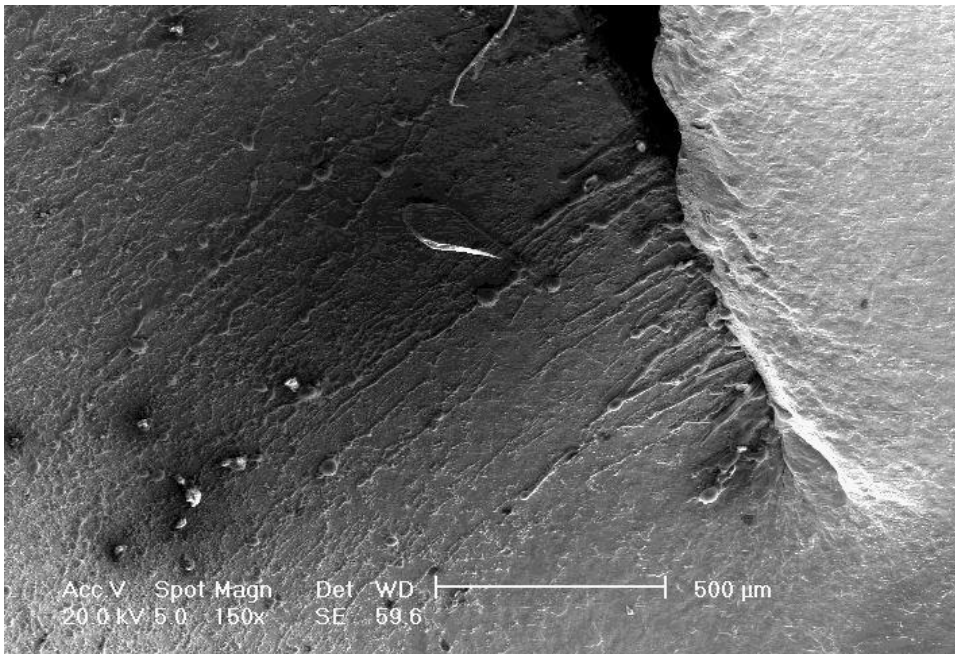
Fracture origin of CSST hole shown in Figure 8. Note the trails of solidified molten metal.
